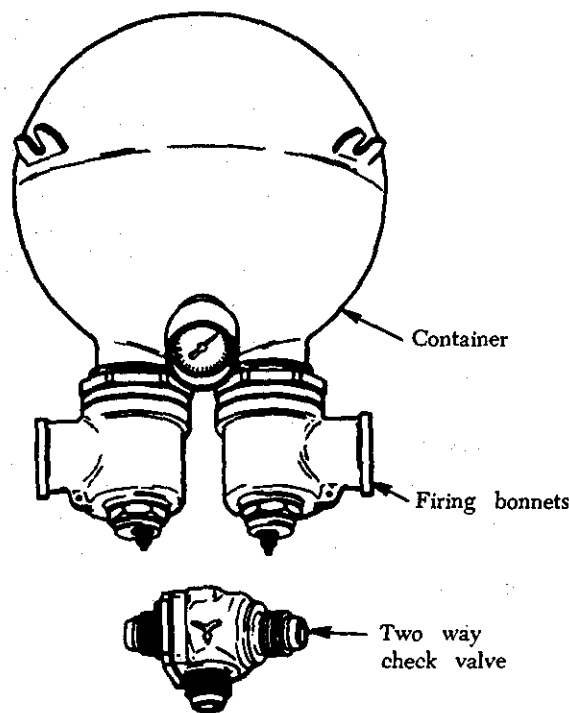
Typical double bonnet extinguisher assembly.
